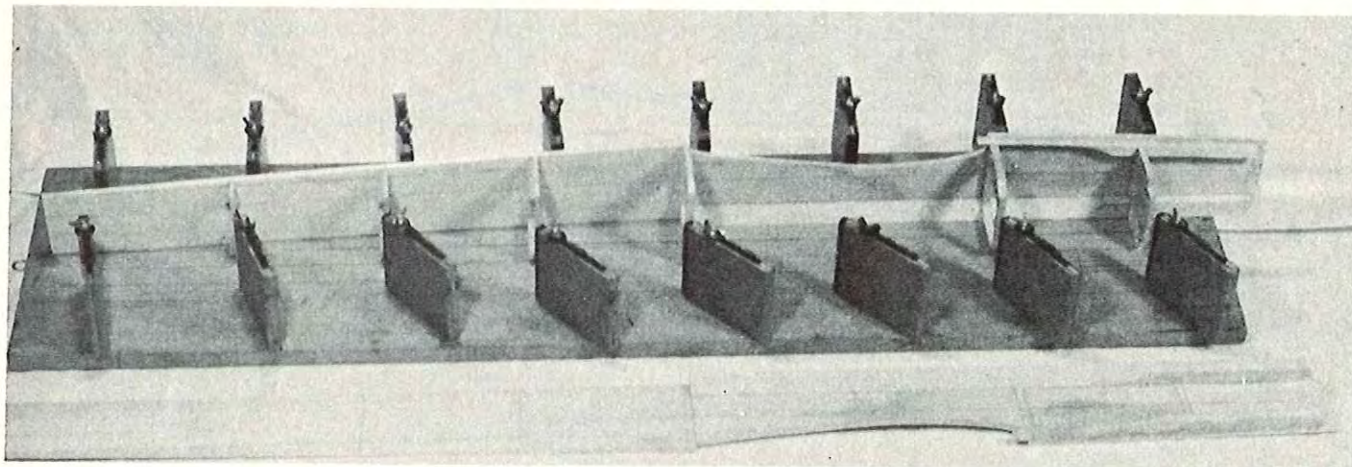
Jig blocks loosened on one side so that formers may be removed.
